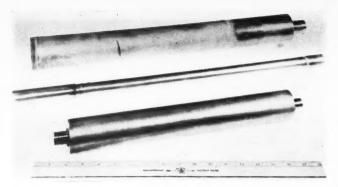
A powdered material for use in a wire type spray gun may be used to hard face workpieces of the type shown here.
